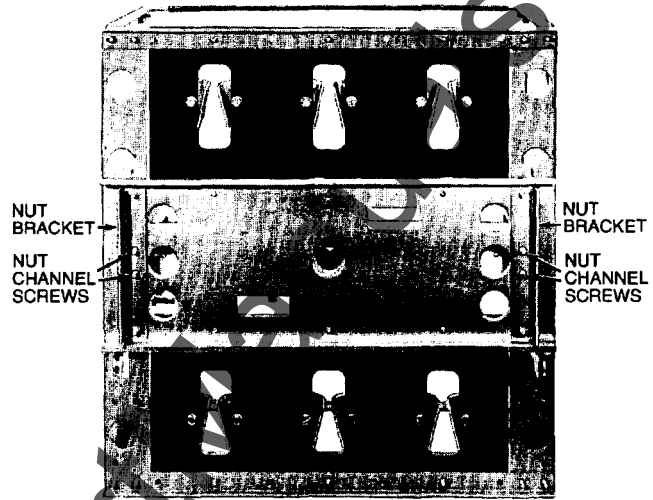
Back view showing assembly of nut brackets used on 800-3000A units
